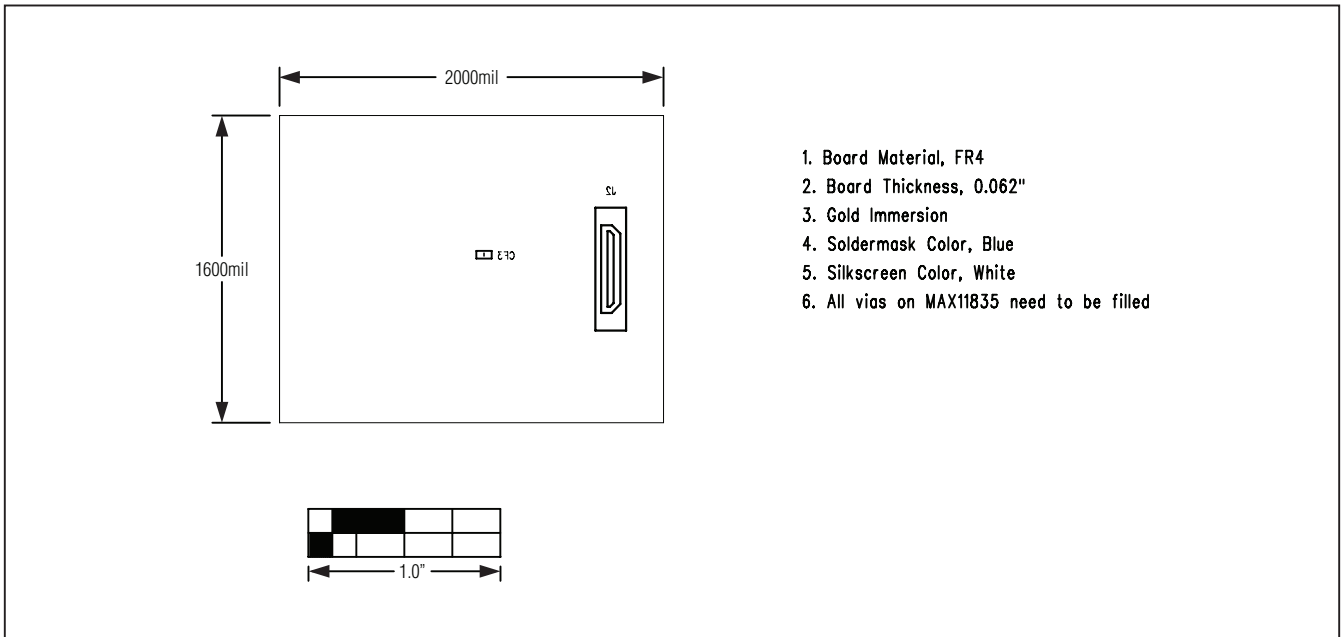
MAX11835 PCB Layout—Bottom Assembly
